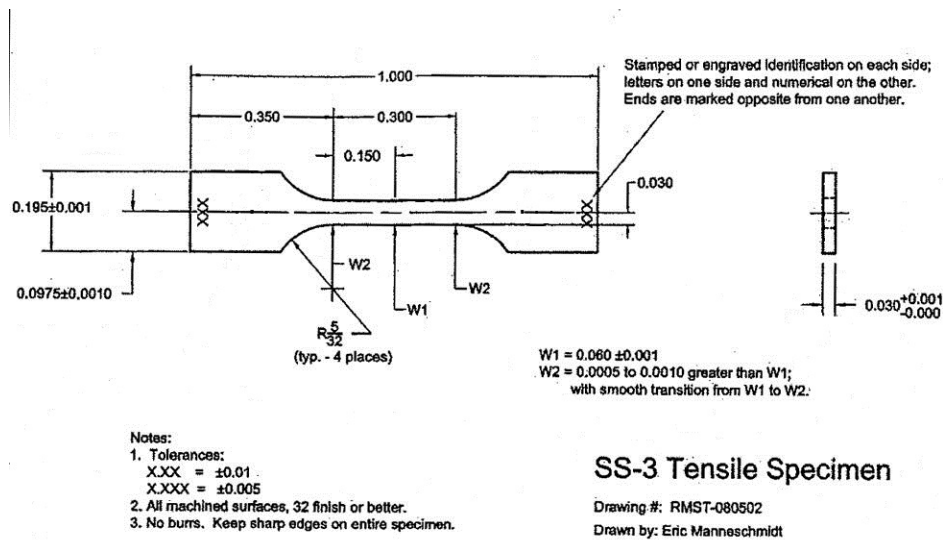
Drawing of the SS-3 tensile sample geometry, dimensions in inches.
